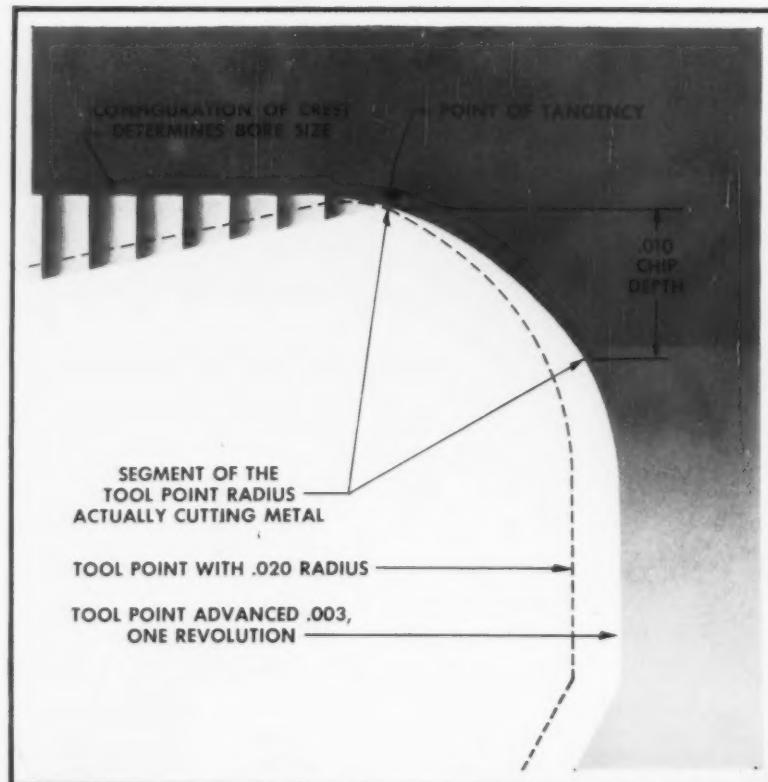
Enlarged view of bore surface generated by tool point shows that crest produced at tangent point affects size and surface finish.
